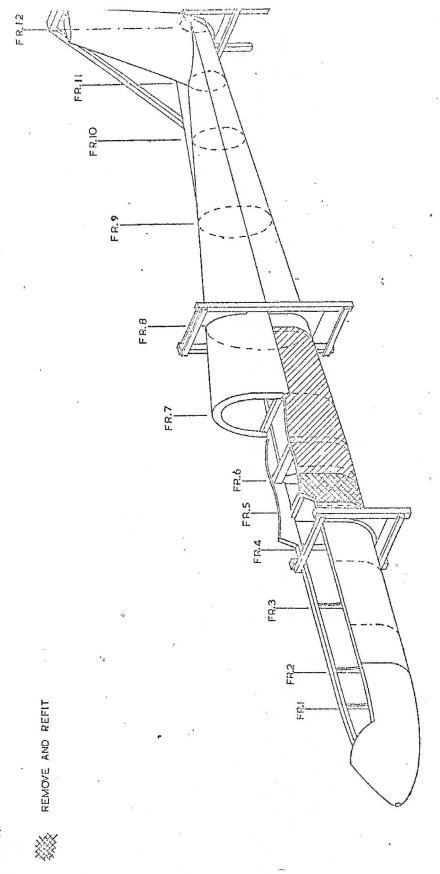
B-03-23 all aircraft Sheets 1, 2, & 3.
